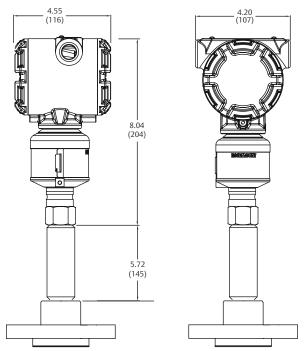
FFW Flush Flanged Seal - Standard (Two-Piece) Design (Shown with Flushing Ring)
